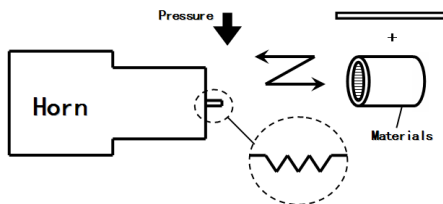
A Principle of Ultrasonic metal welding
